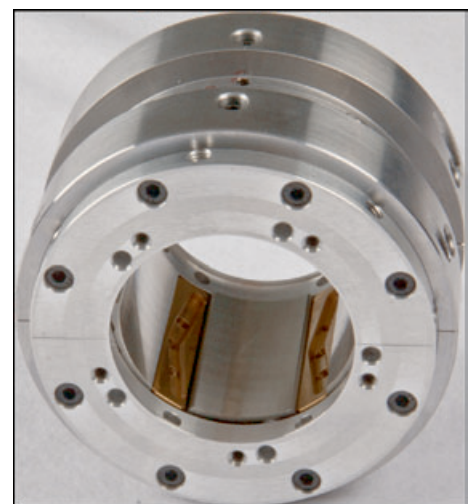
MAN TurboTOP™ journal bearings (Thermal Optimized Pad for turbomachinery)[3]
